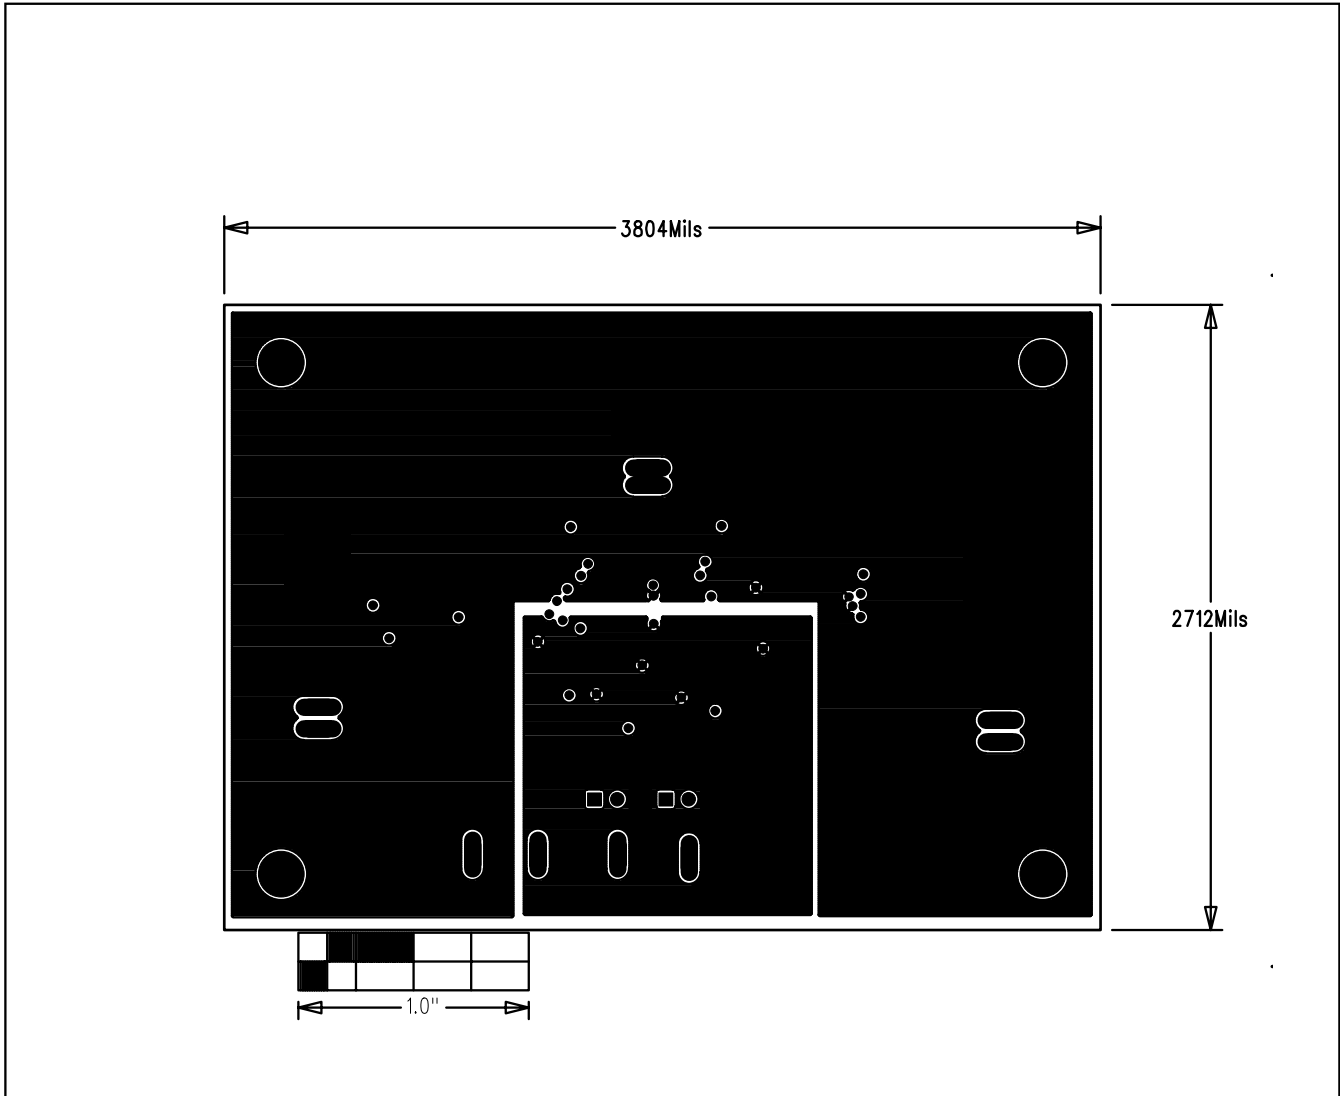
MAX8538 EV Kit PC Board Layout—Inner Layer 3
